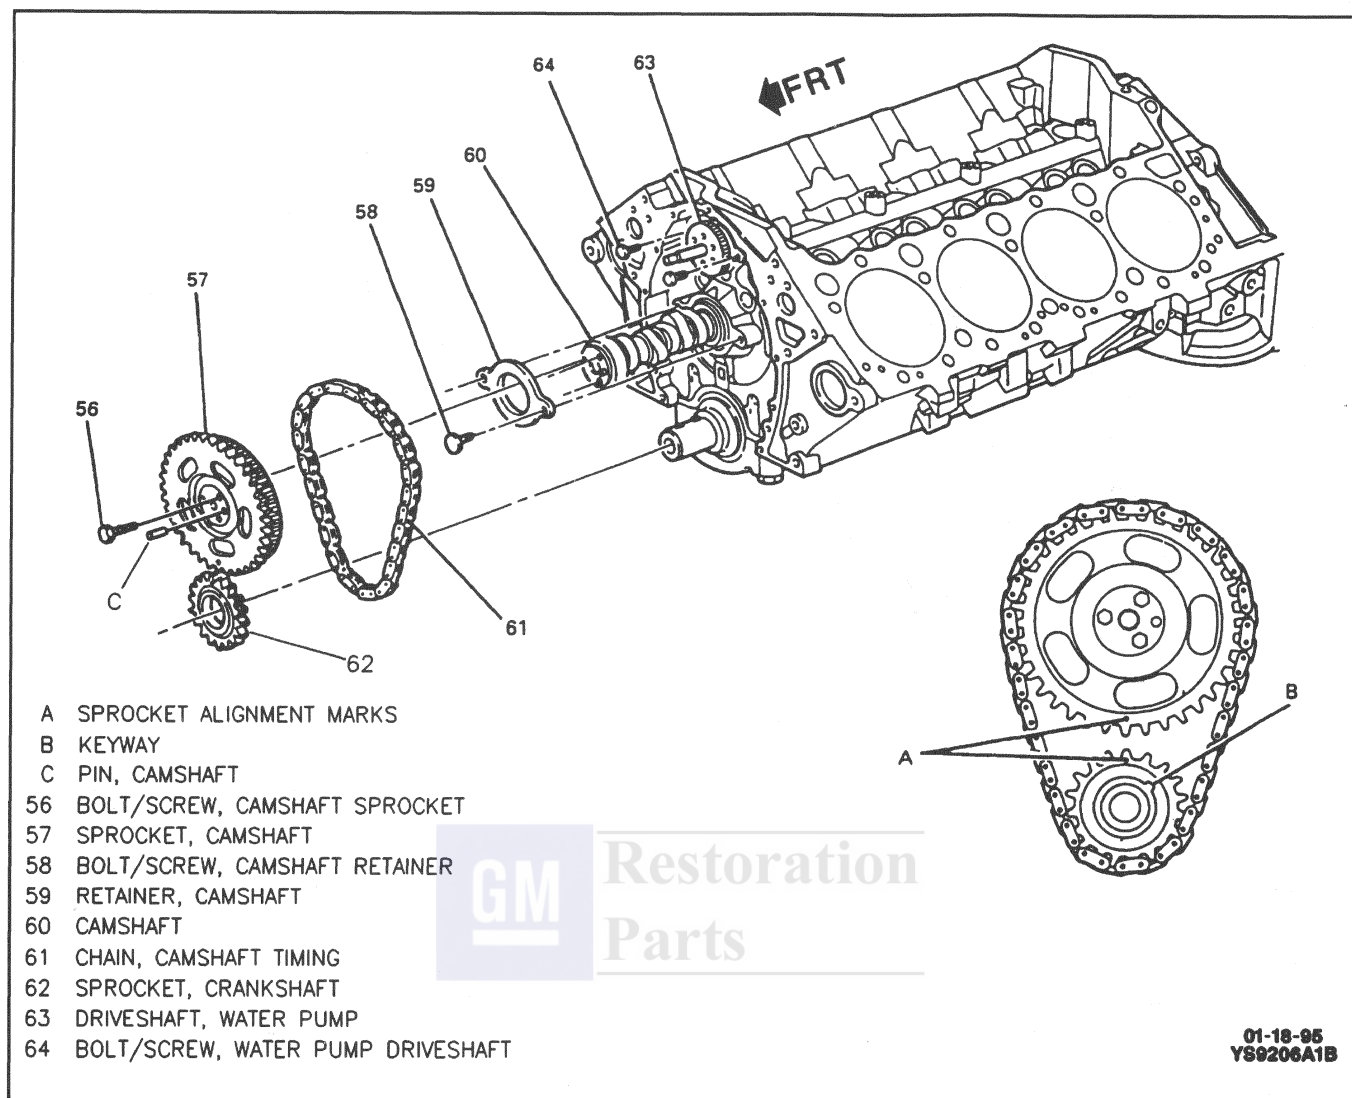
Camshaft, Sprockets, and Water Pump Driveshaft Assembly
